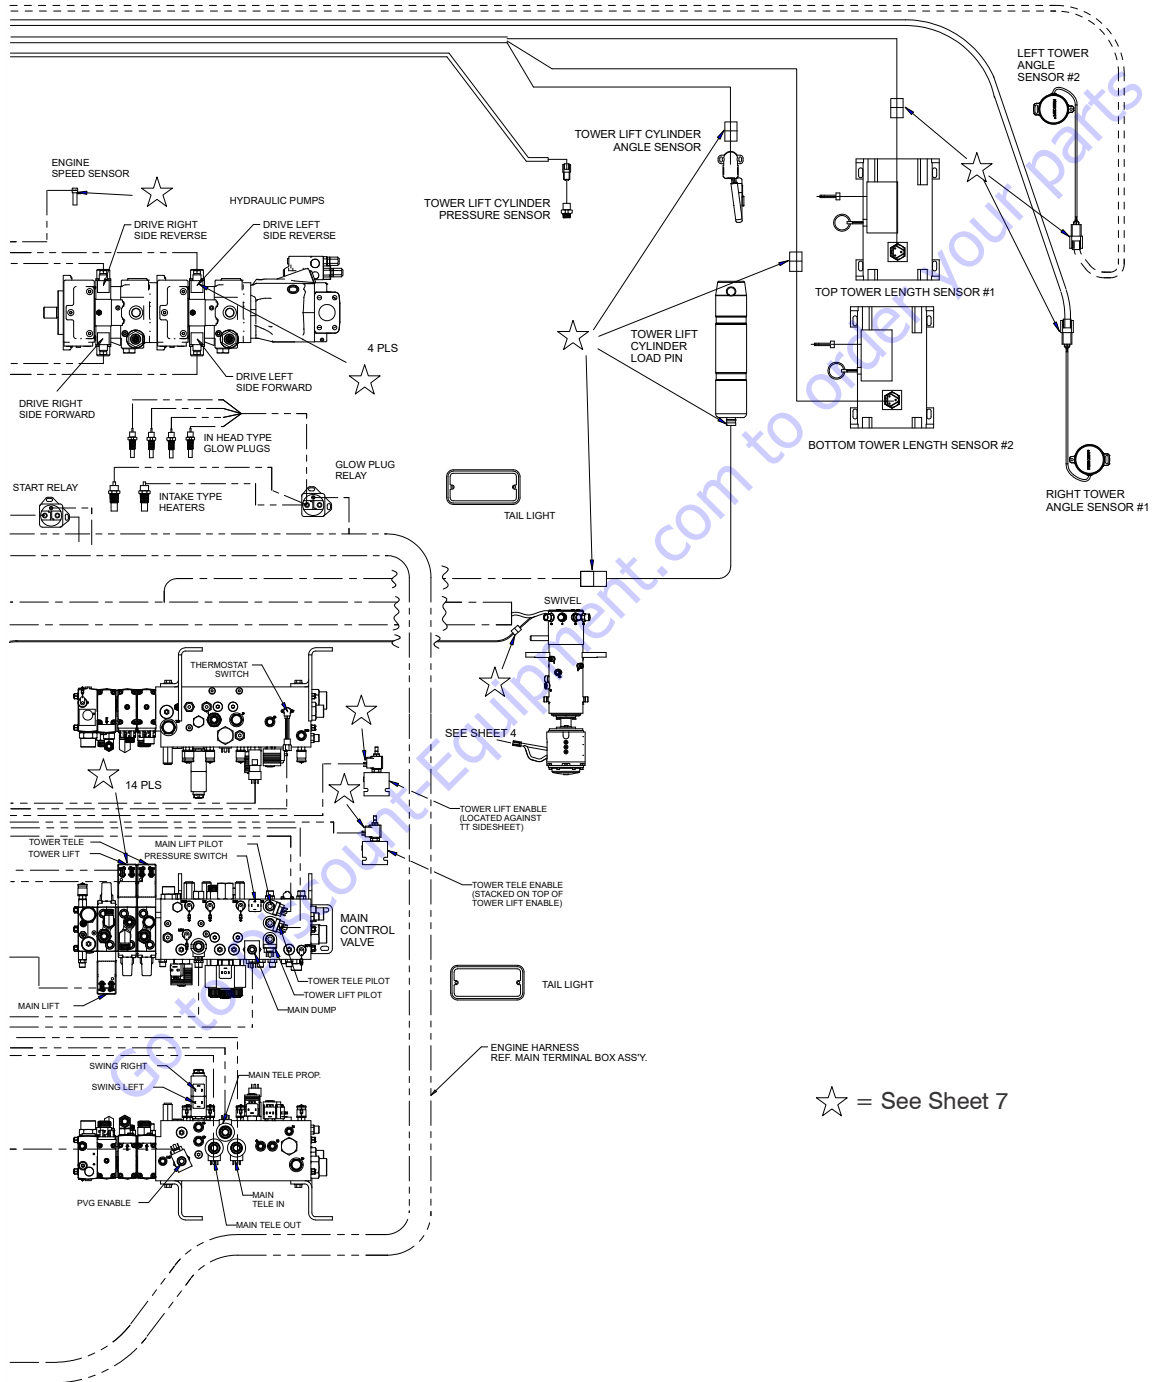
Wiring Harness Installation - Sheet 3 of 7
